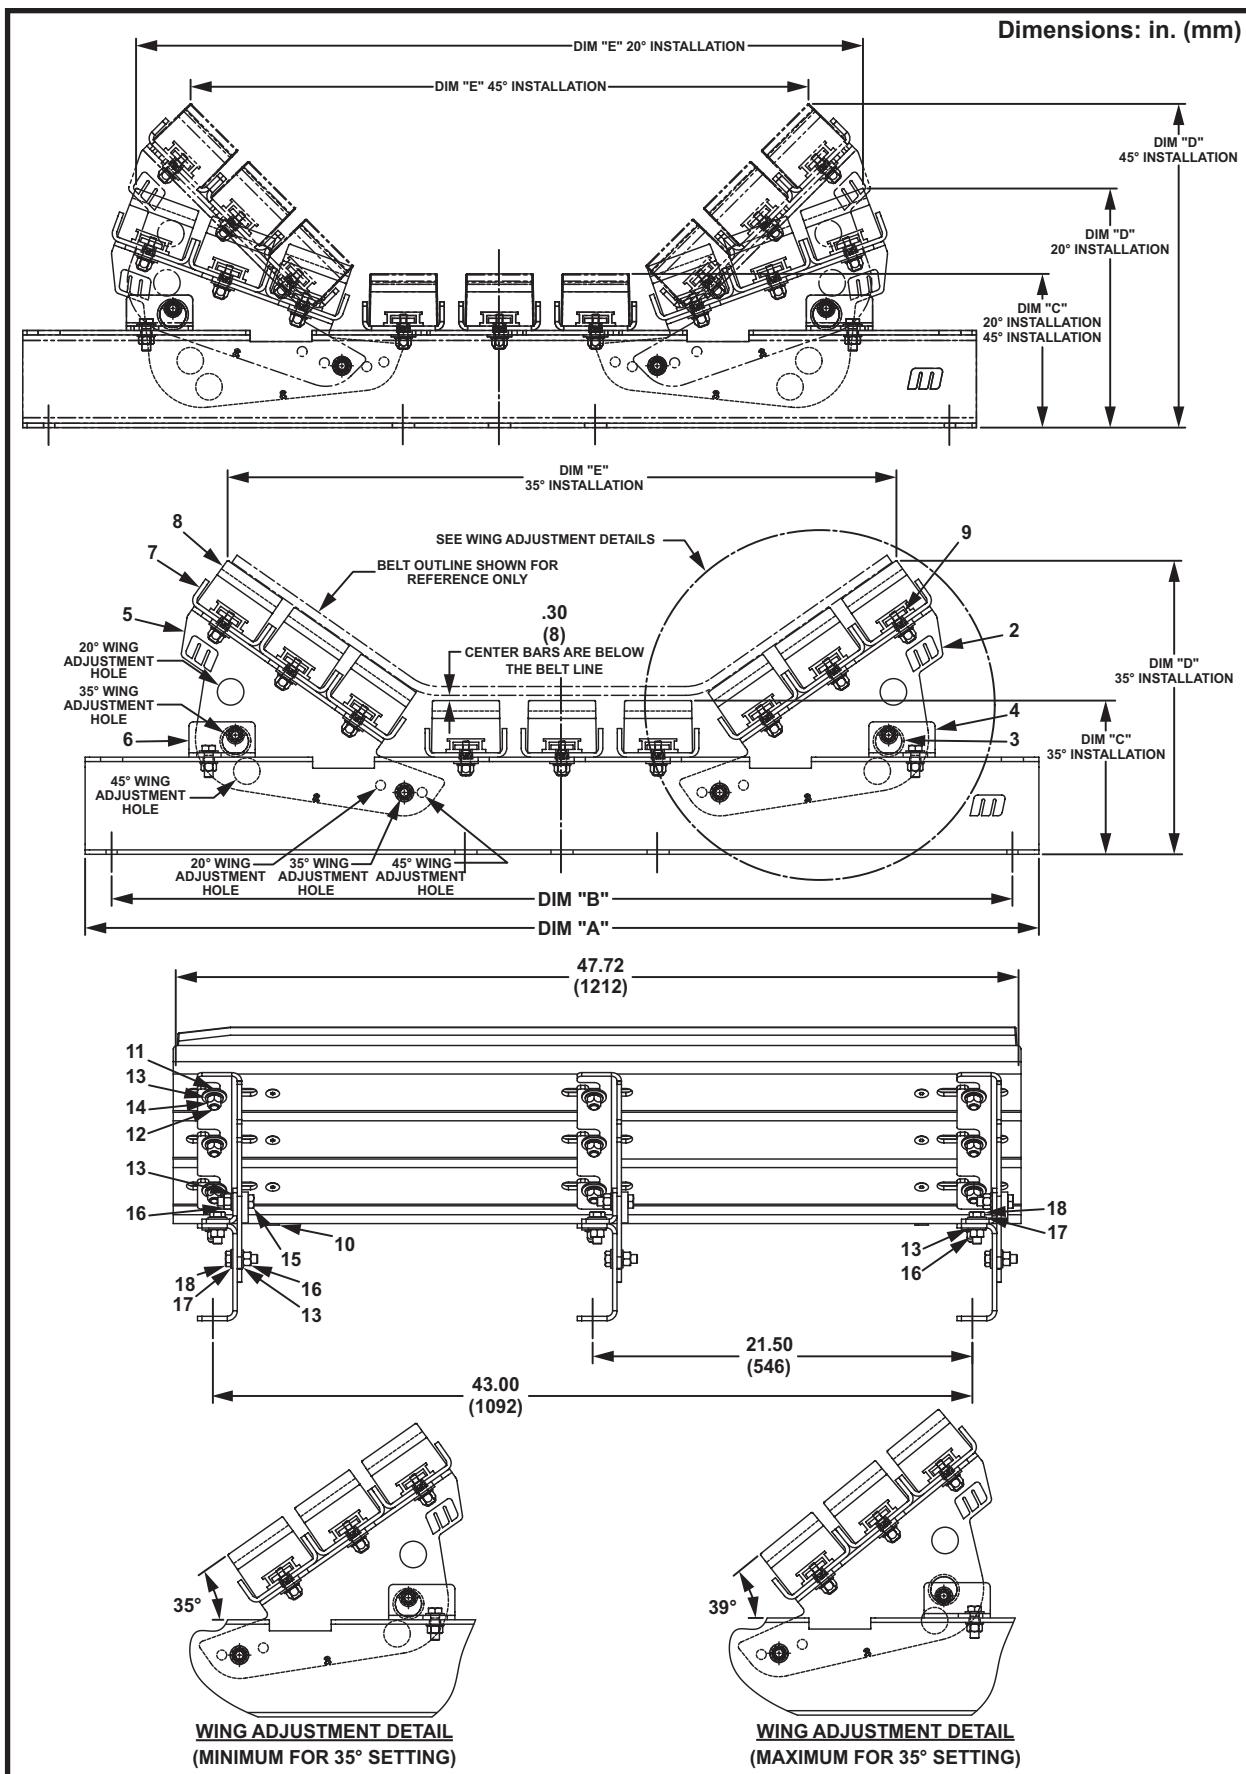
Martin® Impact Cradle LD Assembly, P/N 36010-XXX (Sheet 1 of 2)
